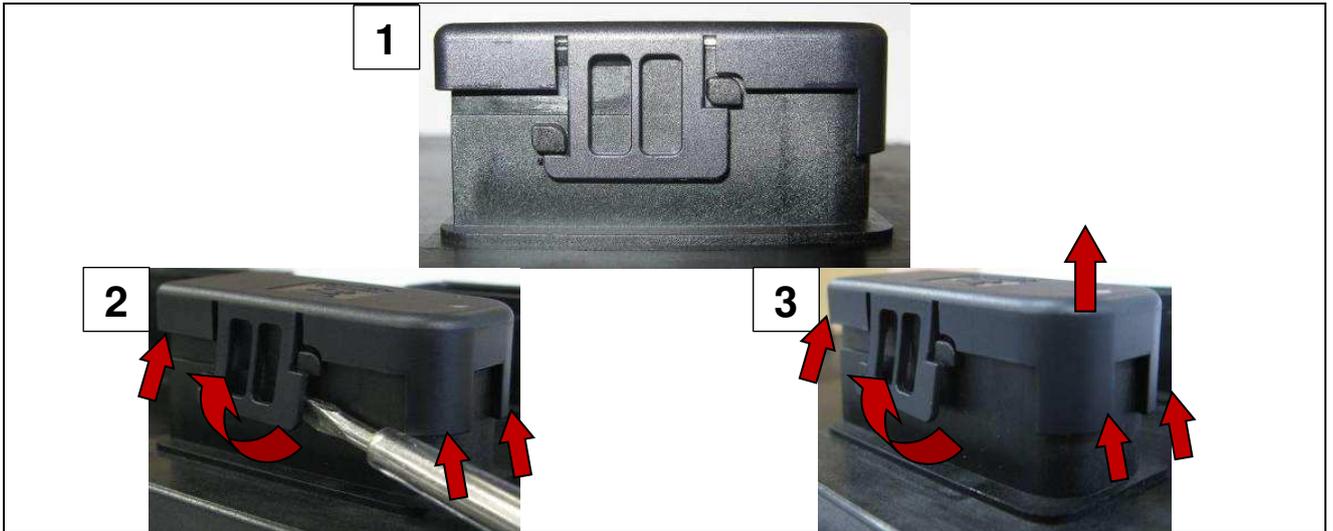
Disassembly of protection cap / Demontage der Schutzkappe
